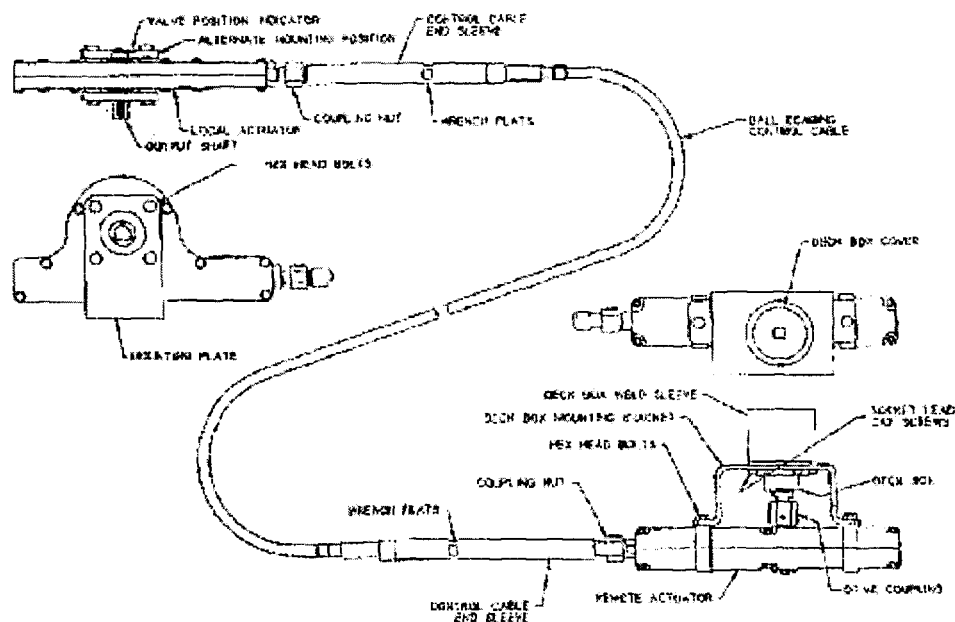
Quarter Turn Ball Bearing Remote Valve Operating System
